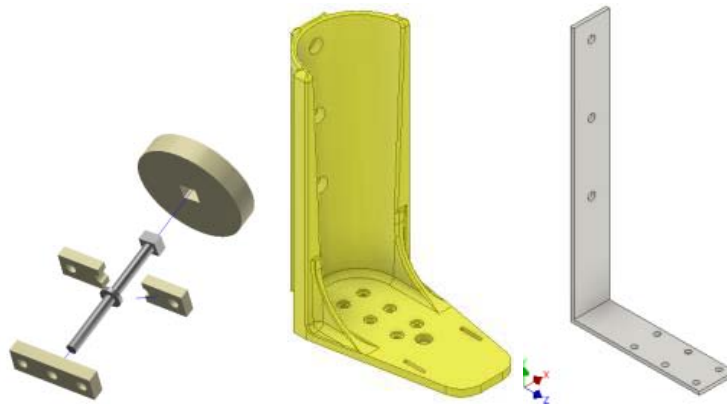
Brake mechanism exploded (left) [5]; Refined foot support and reinforcement (right) [5].
